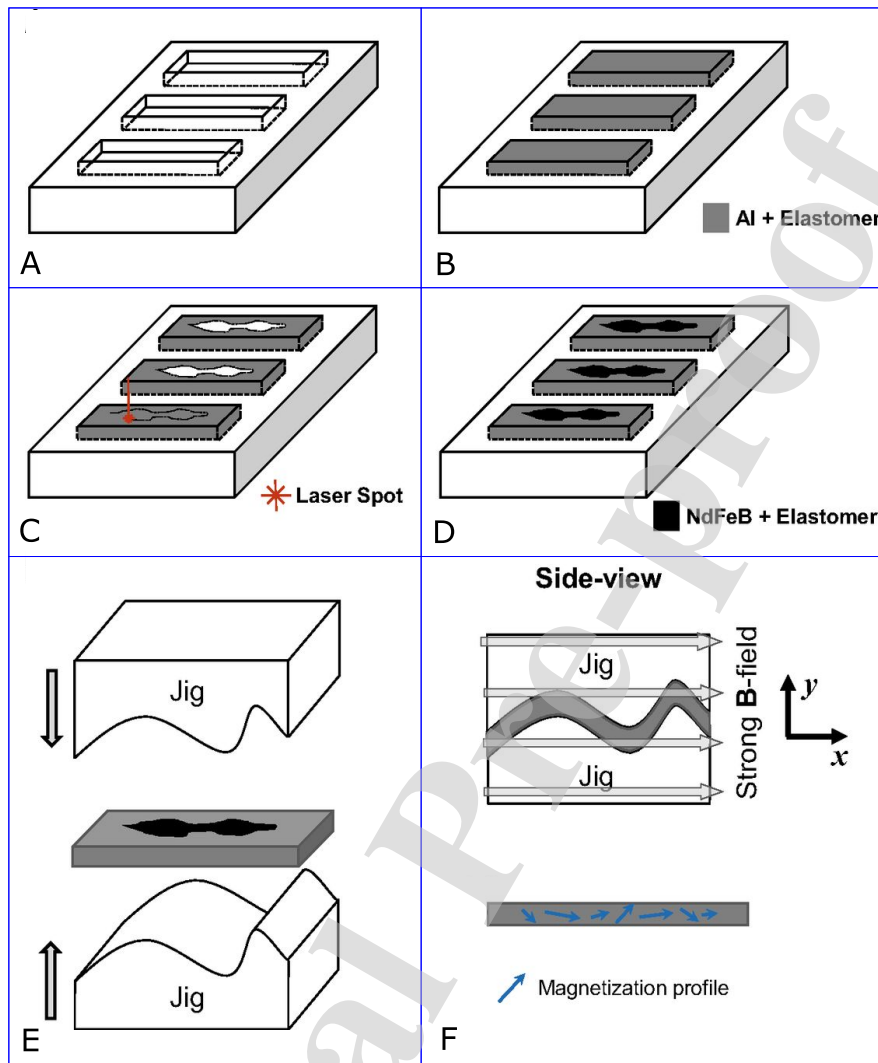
The fabrication of a beam-like structure made of hMAPs using the classical moulding technique: (A) a negative mould for the beam; (B) the passive component containing aluminum (Al) powder and Ecoflex silicone elastomer that was poured into the mould in liquid form and allowed to cure; (C) a laser cutter is used to create a band of nonuniform width containing the continuum magnitude profile of magnetisation; (D) the active component of a hard-magnetic filler (NdFeB) with a silicone (Ecoflex) matrix which was then poured and cured to replace the band; (E) the beam was bent into the jig profile; (F): (above) the beam was magnetized with a strong B field (1 T); (below) the desired magnetisation profile is created after removing the beam from the jig (Figure taken from Lum et al. [18]).
